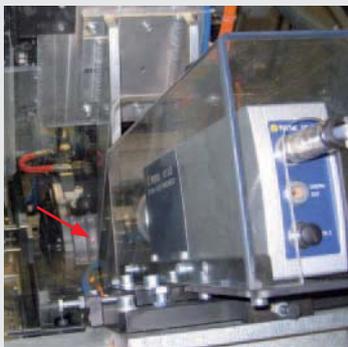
Vibration measurement on the MPA (motor pump assembly). Mark: red laser reflection
